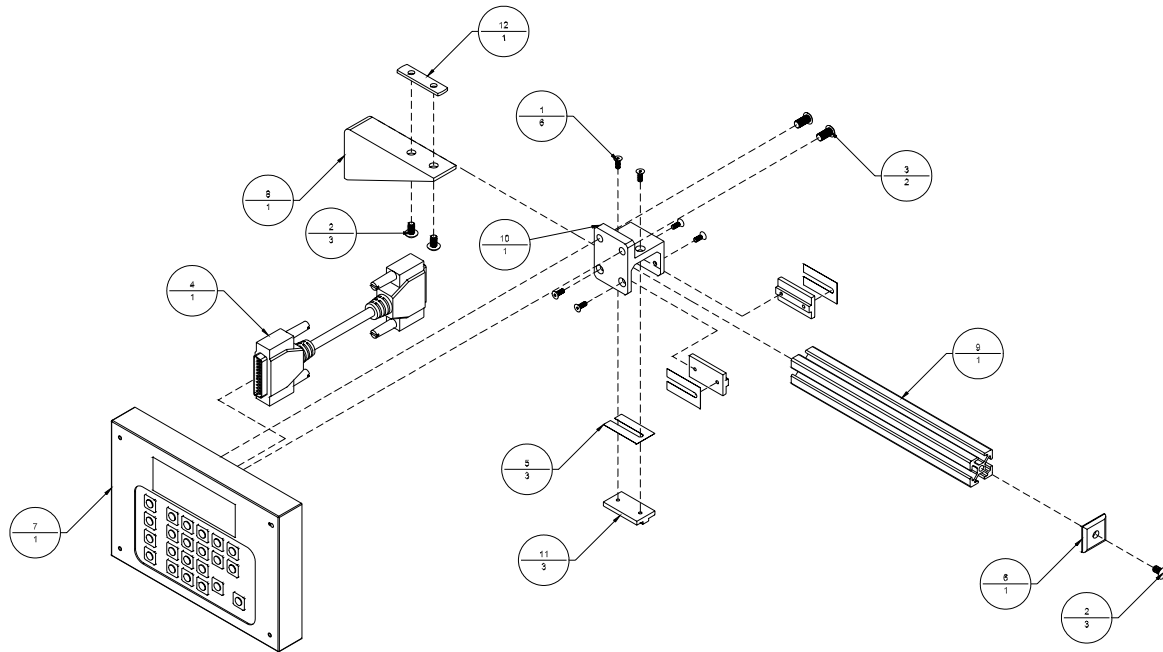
Keypad Mounting Rail Assembly (9101121A)
